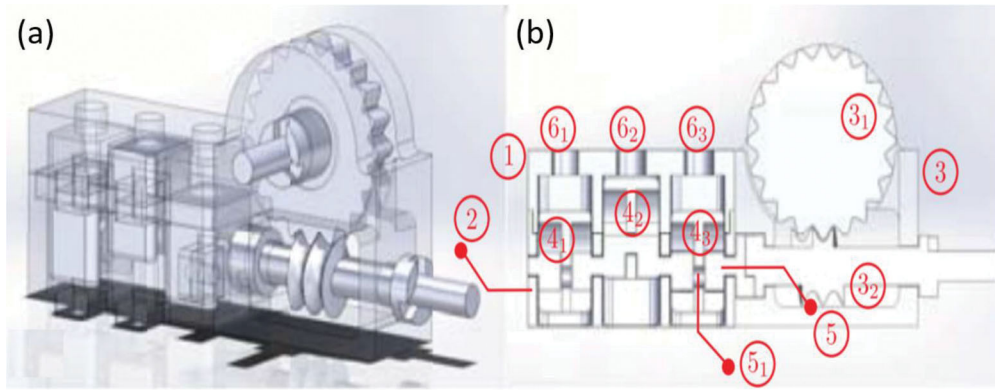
(a) Assembly drawing of the PneuAct and (b) longitudinal cross section drawing of the PneuAct.²³
